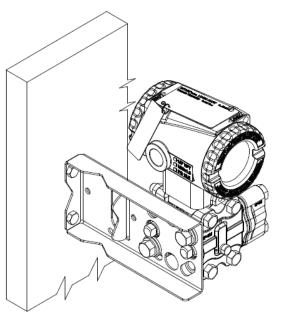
(g) – Dimensional Drawing and Mounting Position for the LD400 HART – Pressure Transmitter with Insertion Probe
